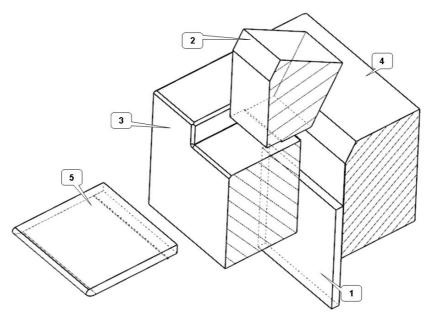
Tool arrangement of IECAP at the ISx machine (1) pusher (2) punch (3) die (4) clamp (5) billet
